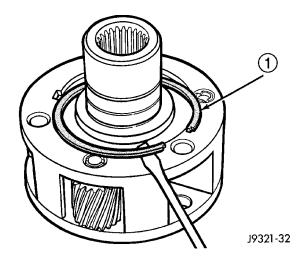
Input Gear Snap-Ring Removal 1 - INPUT GEAR SNAP-RING
